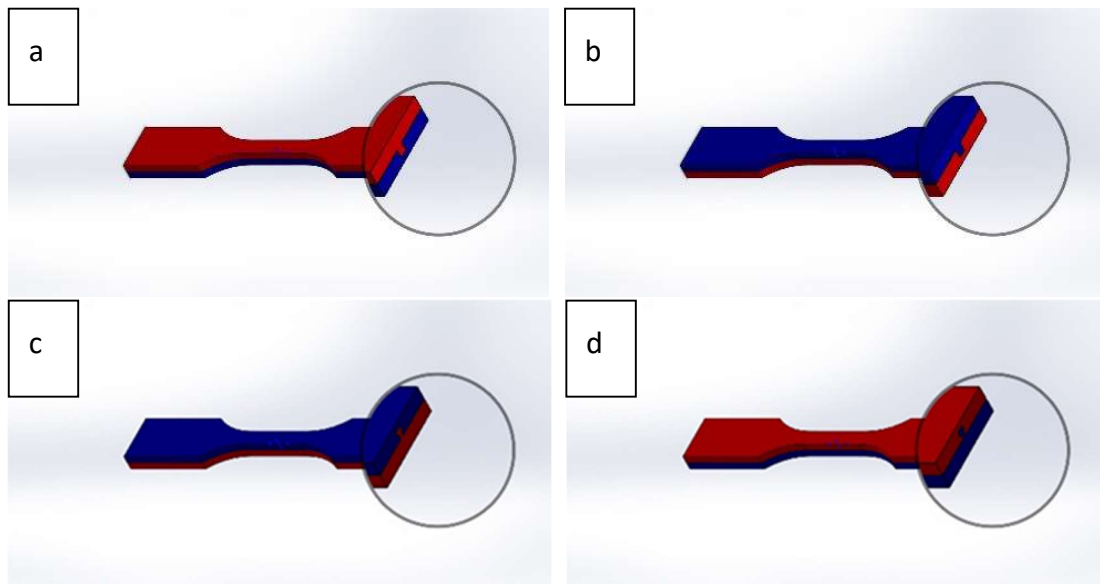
CAD diagrams for all finished specimens, in which red parts were fabricated using FDM and blue ones were overmolded: a) male cube; b) female cube; c) male T; d) female T.
